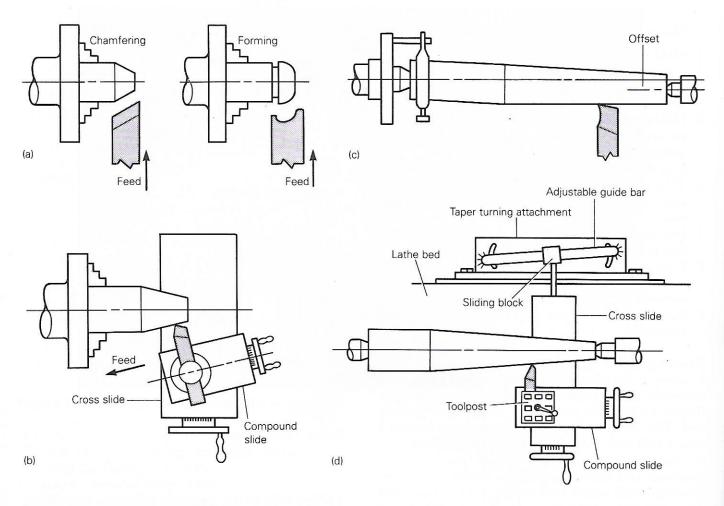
Taper turning: (a) use of form tools; (b) compound slide; (c) offset; (d) taper turning attachment.
